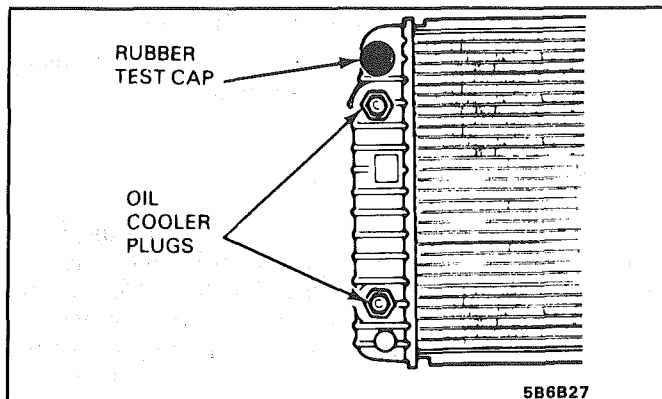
Aluminum Radiator and Oil Cooler Plugs
